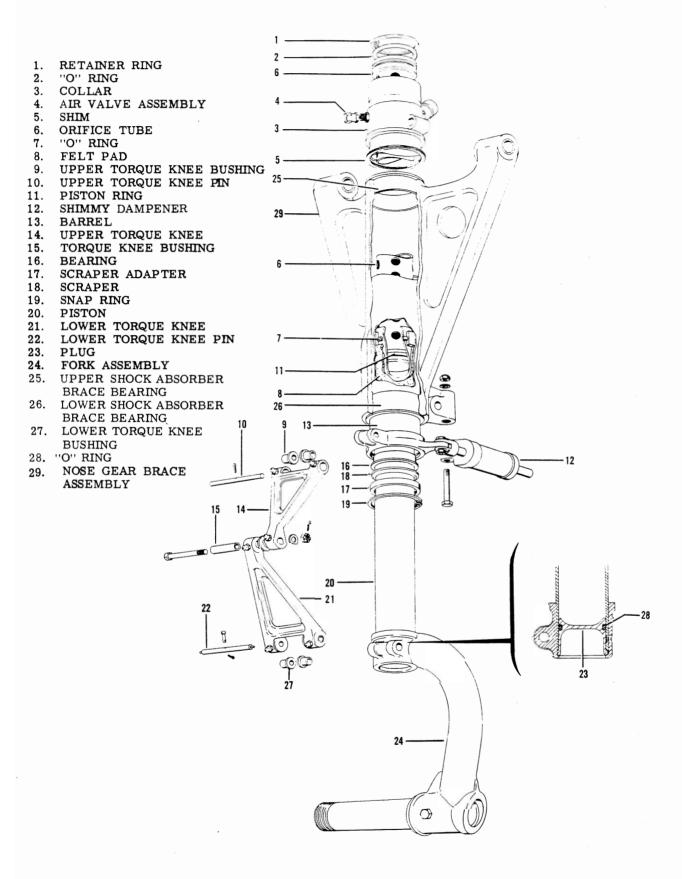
Nose Landing Gear Shock Strut Assembly (Airplane Serial TD-403 and after)
